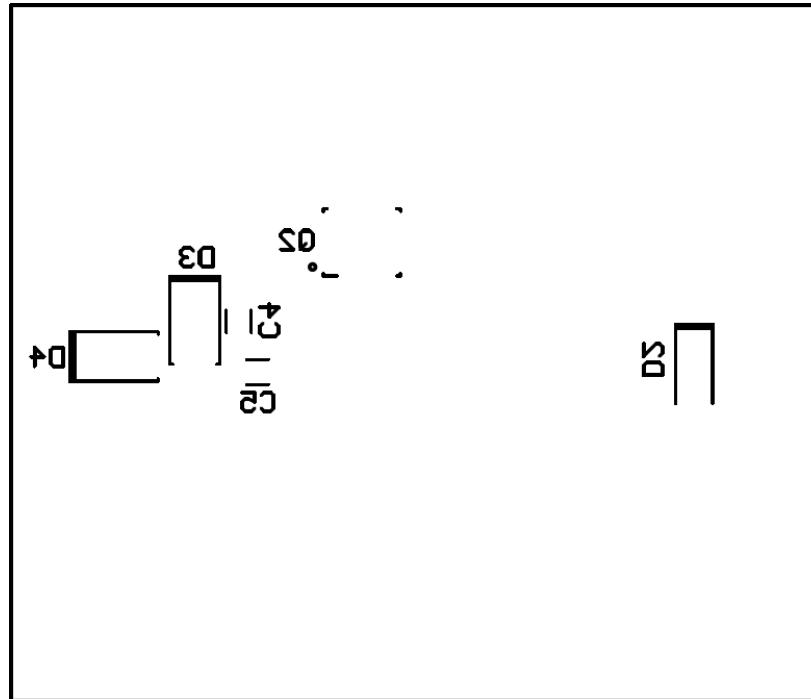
LM74500Q1EVM Bottom Side Placement
